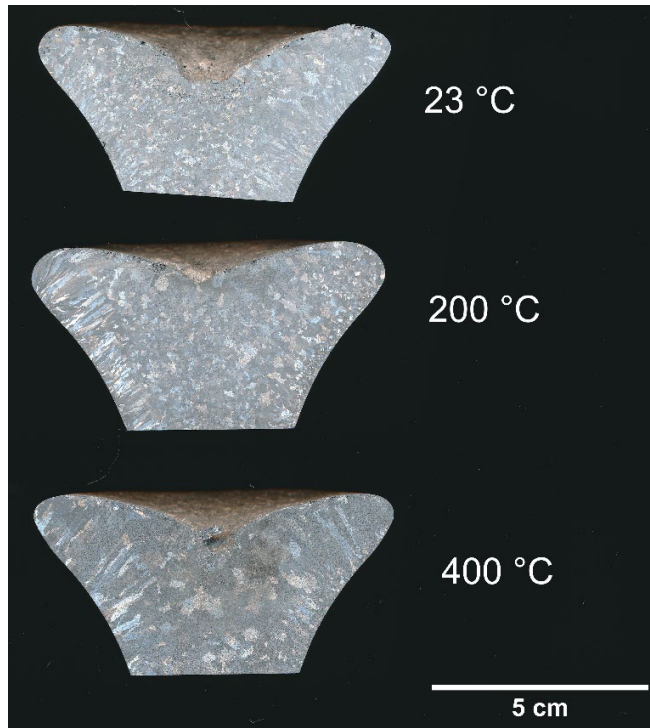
The macro-etched structure of the riser at different Cu mold preheats cross-sectioned in half
